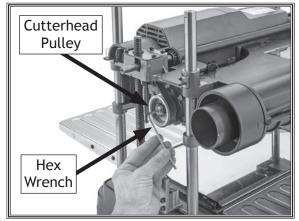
Inserting hex wrench in cutterhead. (Top cover and sides removed for clarity.)
